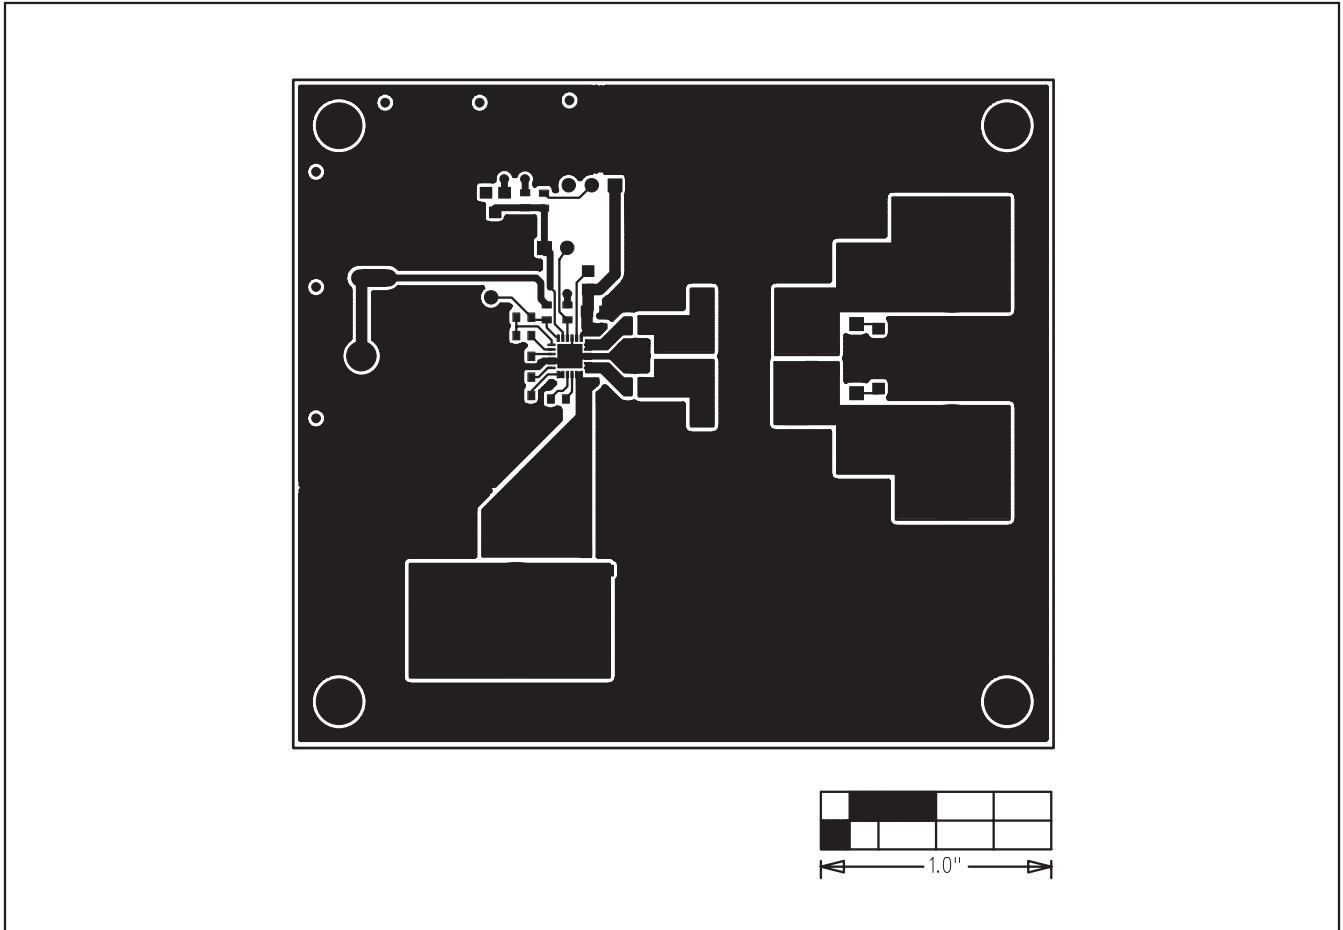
MAX9737 EV Kit PCB Layout—Component Side
